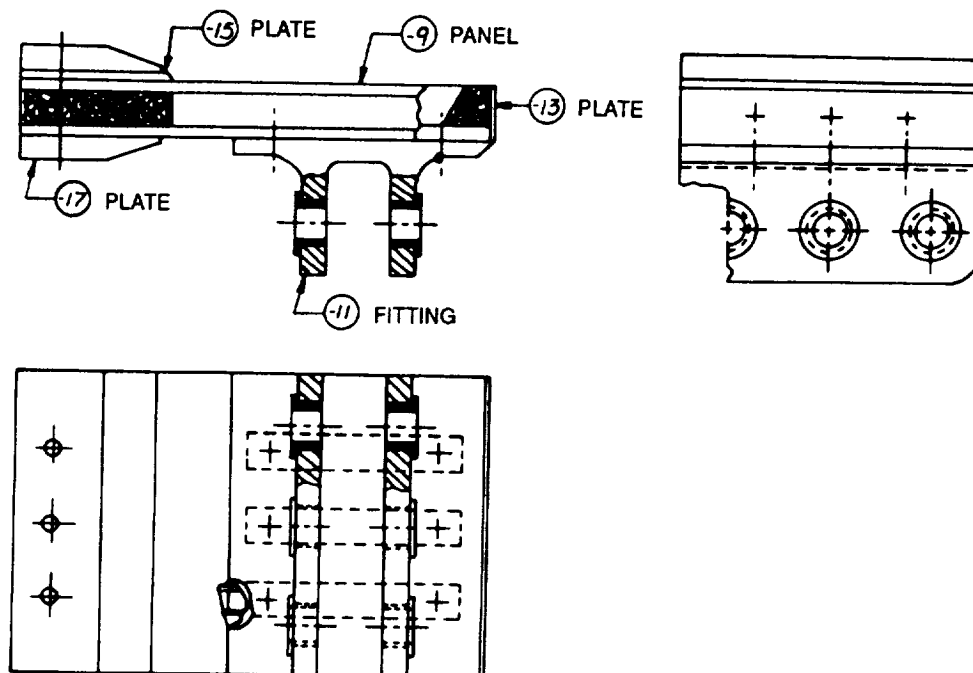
3 PANEL ASSEMBLY — SMALL TEST SPECIMEN OF SLIDING-JOINT CONCEPT
